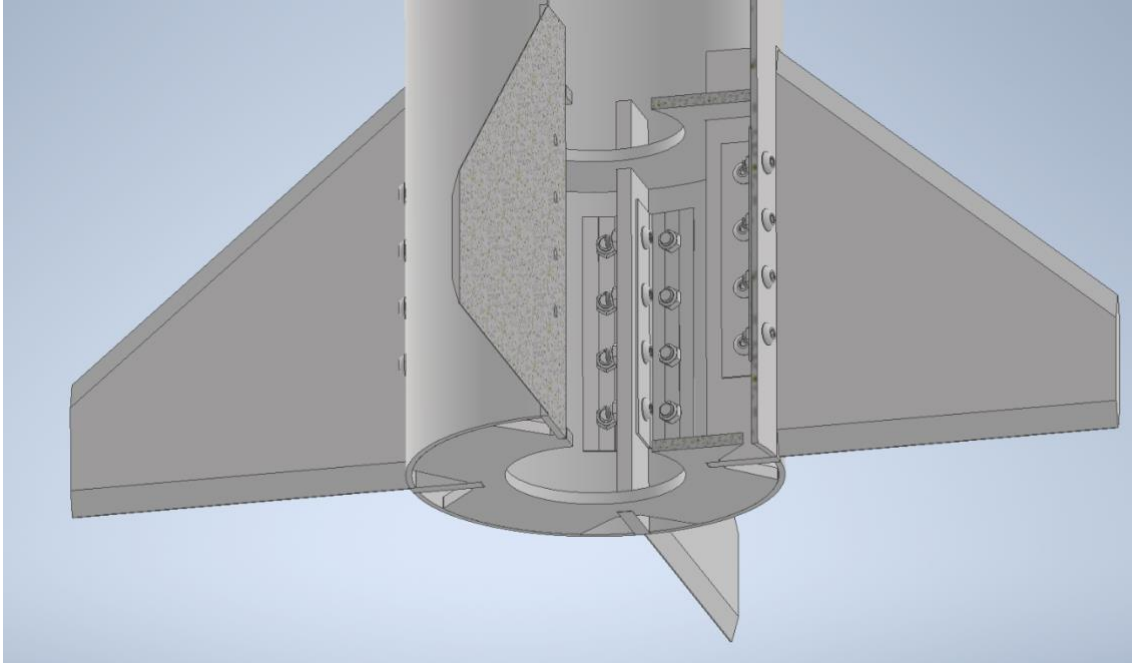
Sliding attachment mechanism, quarter-cut to show the connection between body, motor centering rings and fins.
